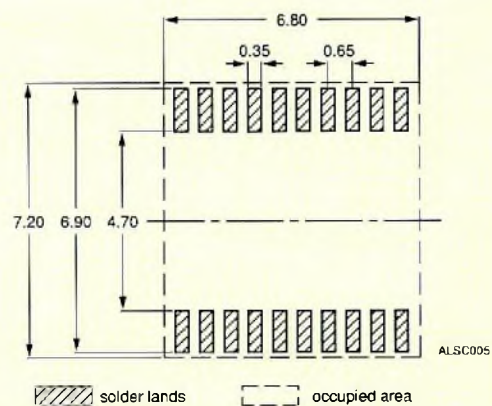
PCB footprint dimensions (in mm) for mounting an SSO-20 package on a PCB for reflow soldering
